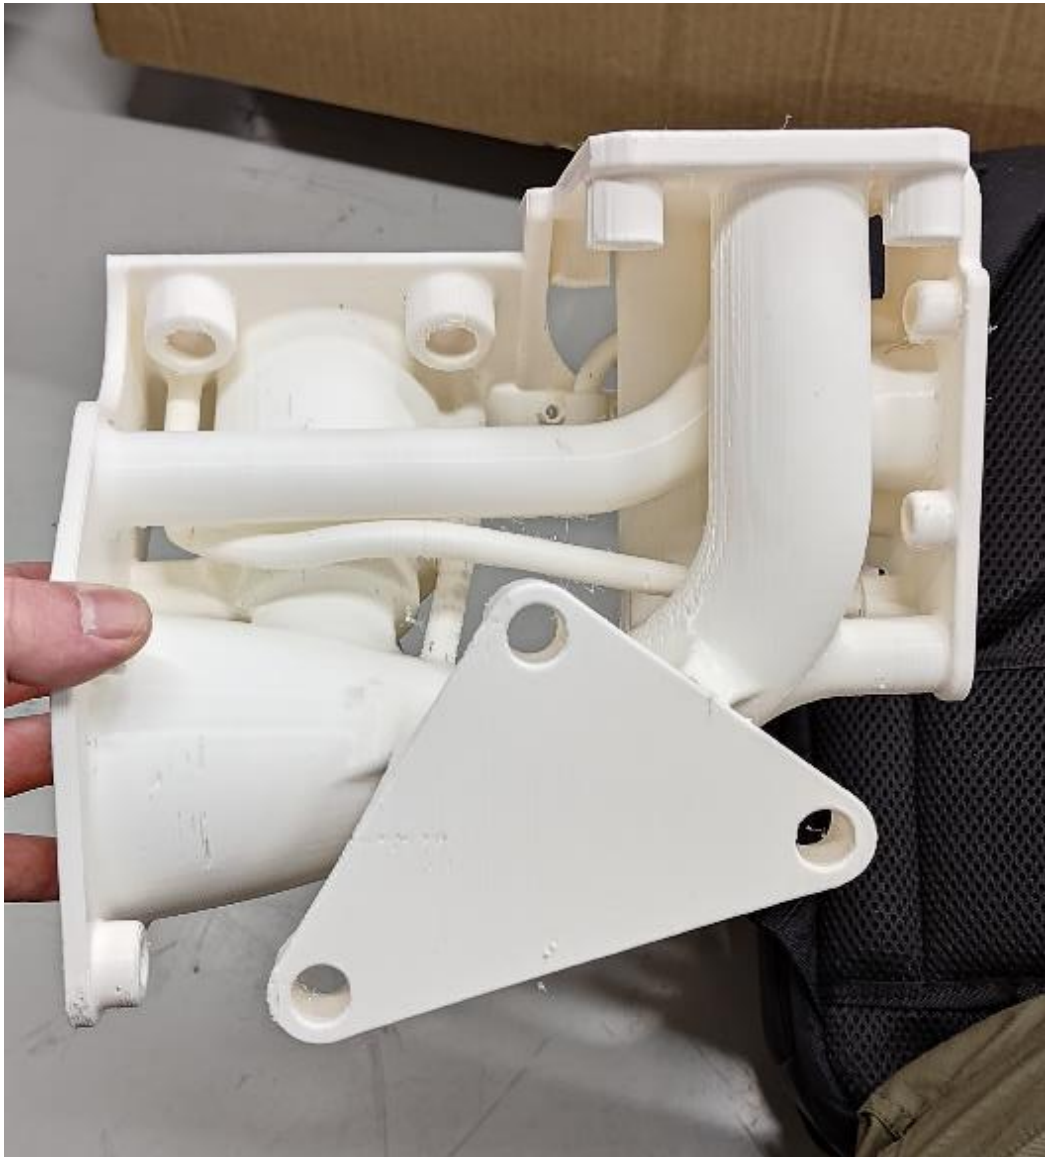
Plastic 3D printed oil block of the new concept (bottom side up).
